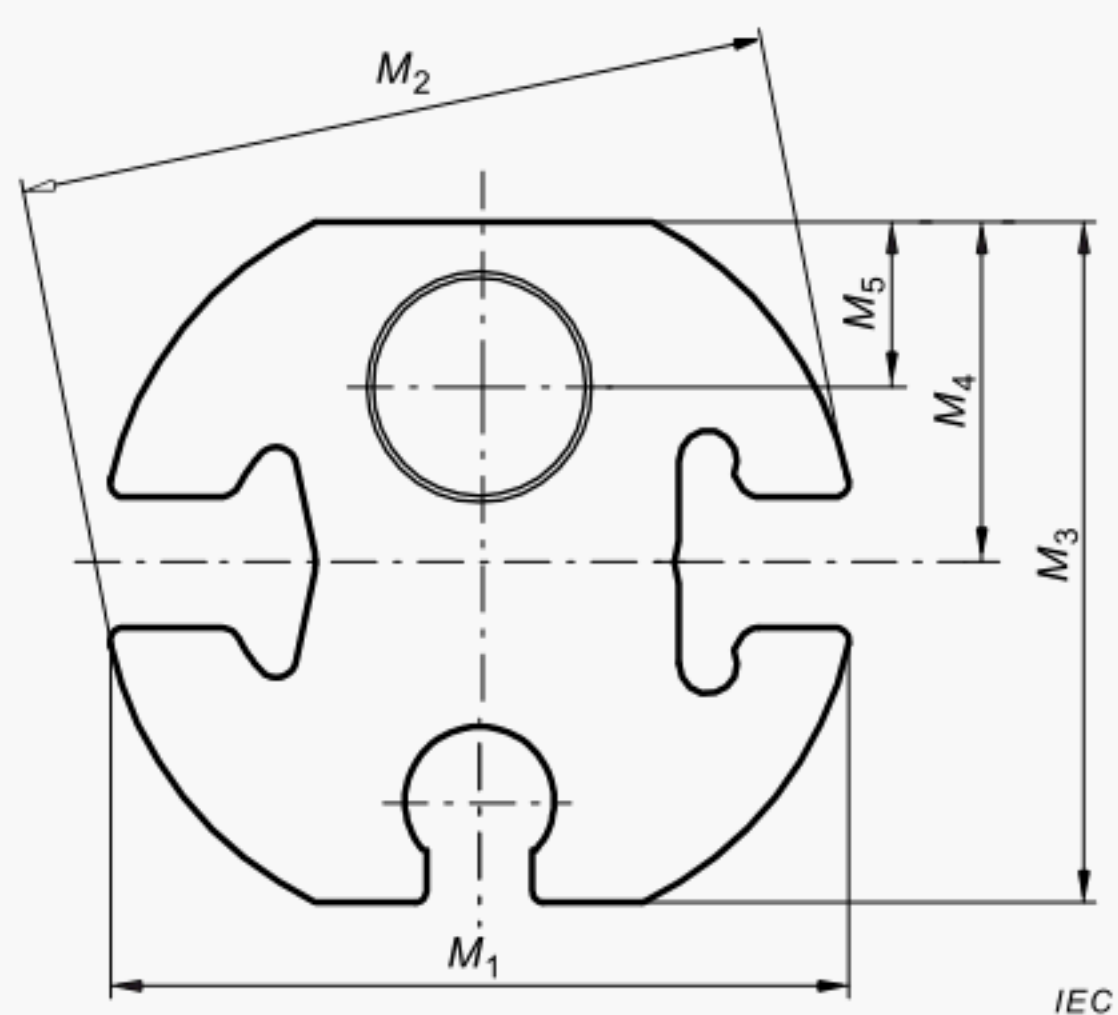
Dimensions of gauges for ball coupling size 16N and 18N
